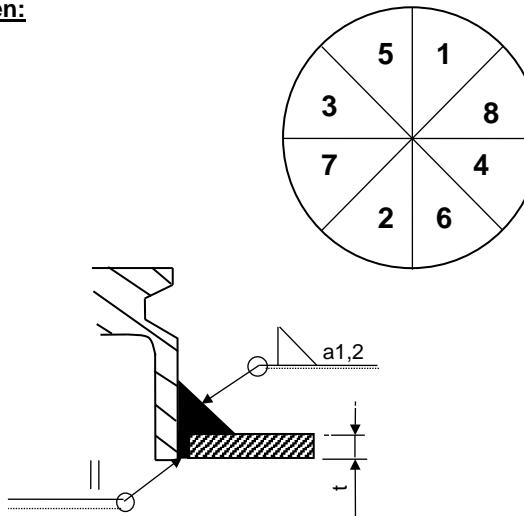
5=welding jig for housing connection flange T-S / Z=welding
